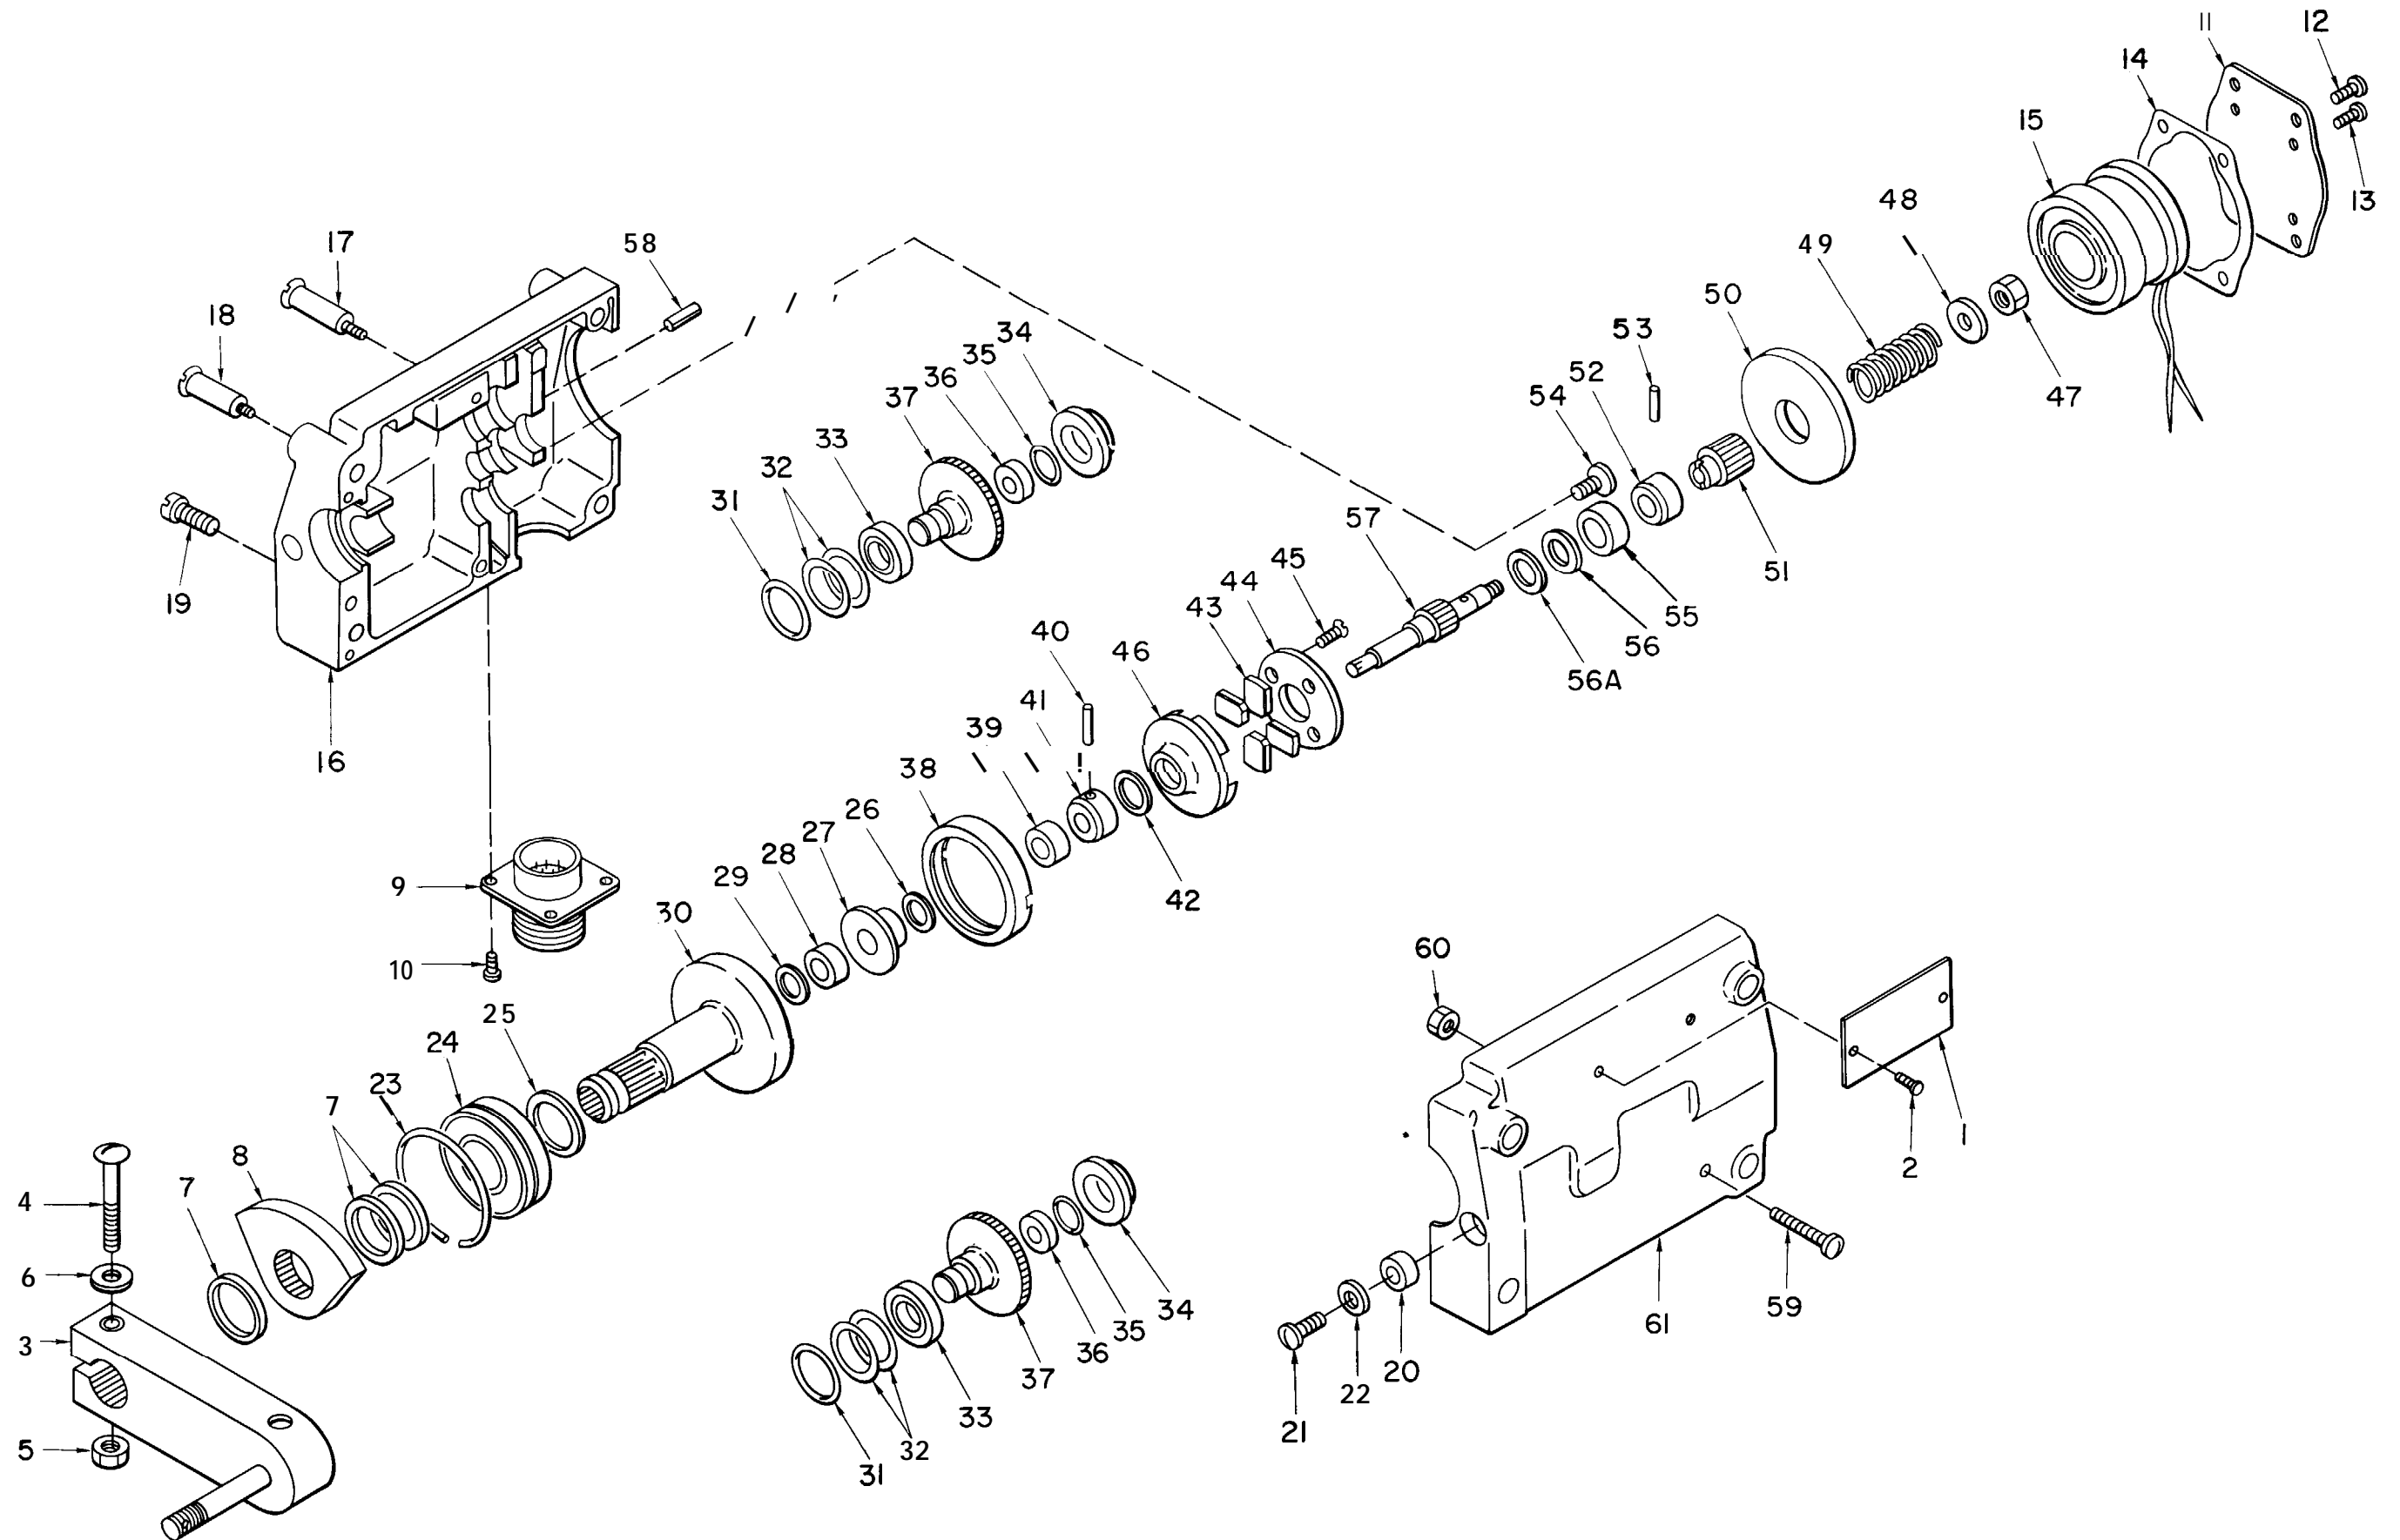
Magnetic Brake Assembly, Exploded View, Part No. R460M10, R460M15 and R460M15-3.
